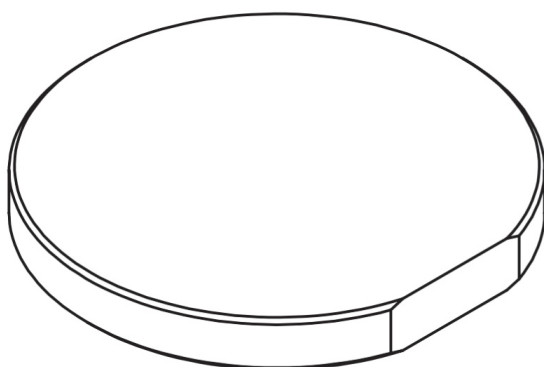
Wire Electrical Discharge Machining (WEDM) diagram of the specimen.
